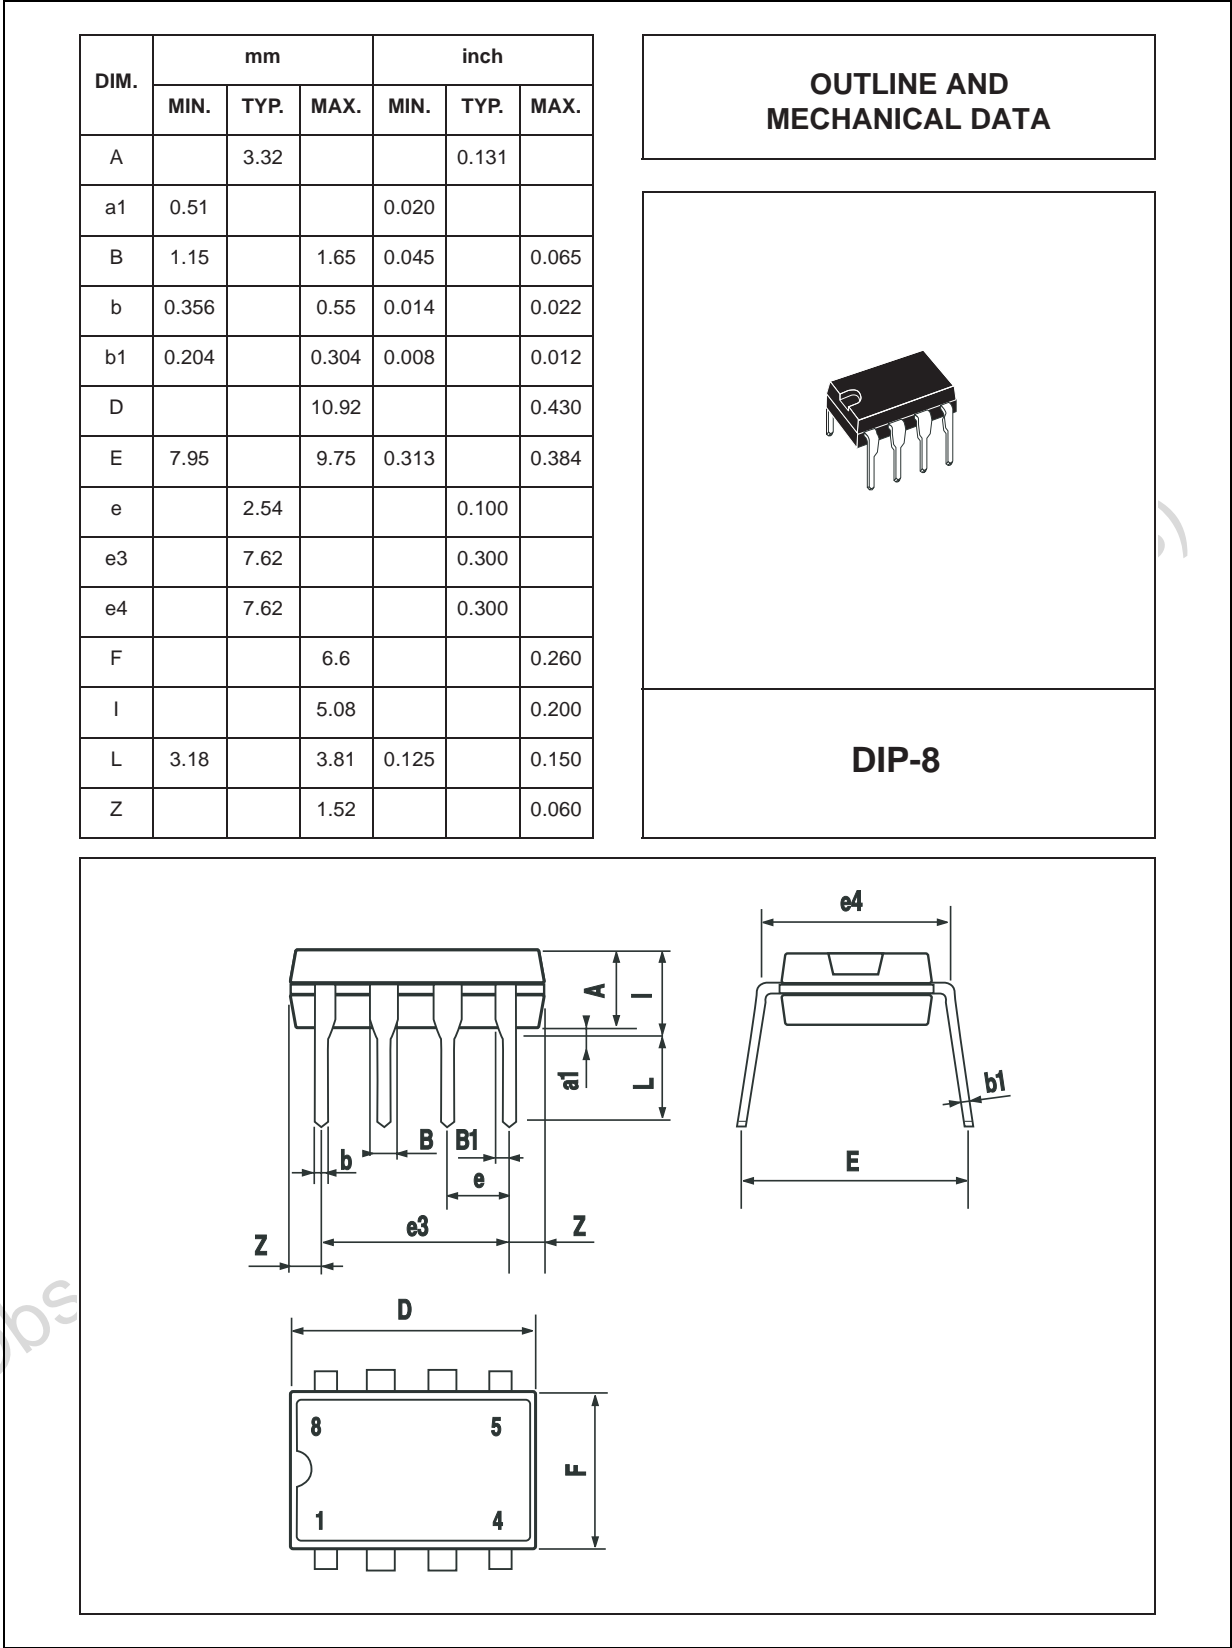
DIP-8 Mechanical Data & Package Dimensions
